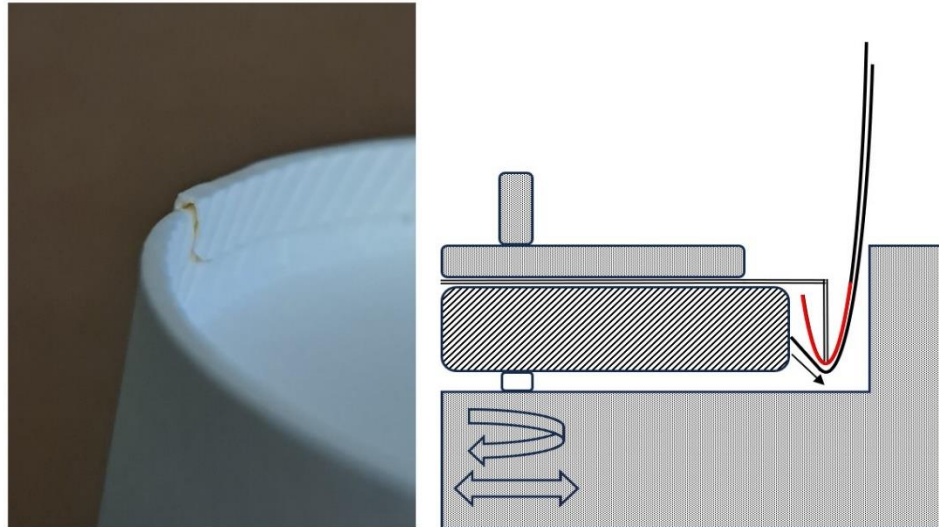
An opened bottom seam on a cup and a suspected failure mechanism.
